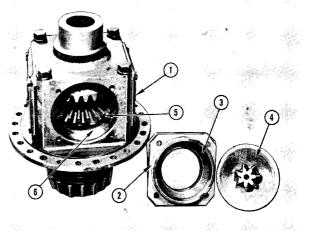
PINION AND BUSHING REMOVED 1. Differential 4. Pinion
